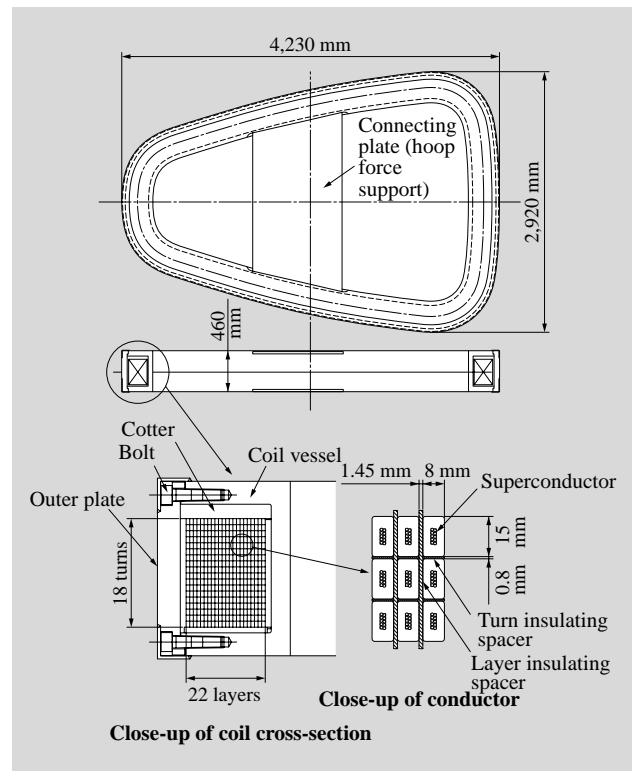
Main Coil Configuration. Overview of the main coil, the winding, and close-up of the superconductor is shown.
